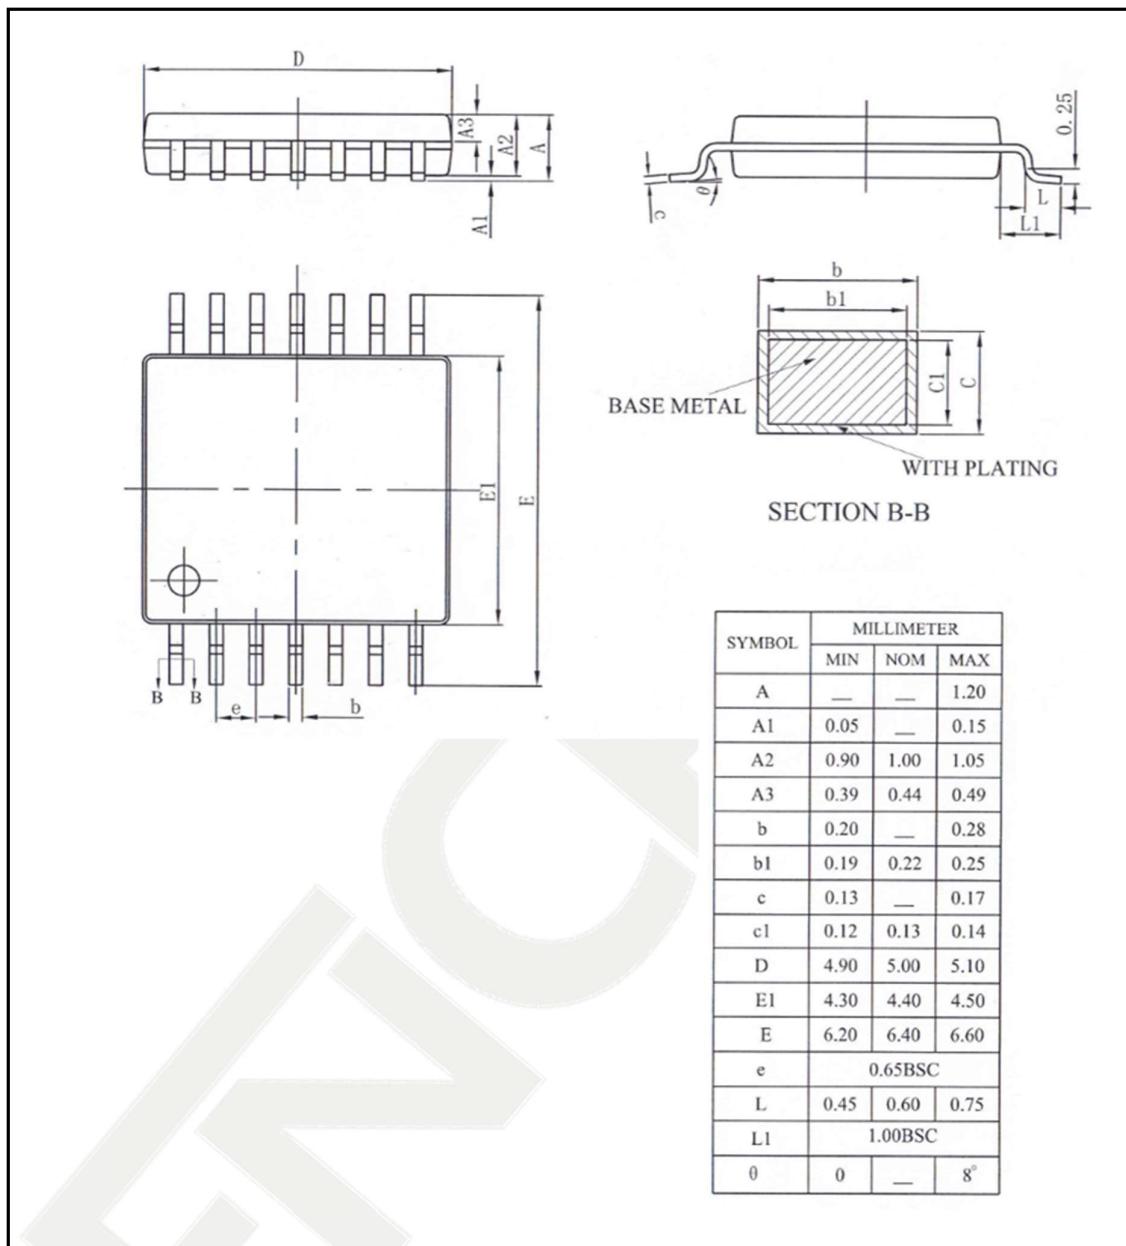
TSSOP14 Mechanical Data and Package Dimensions
